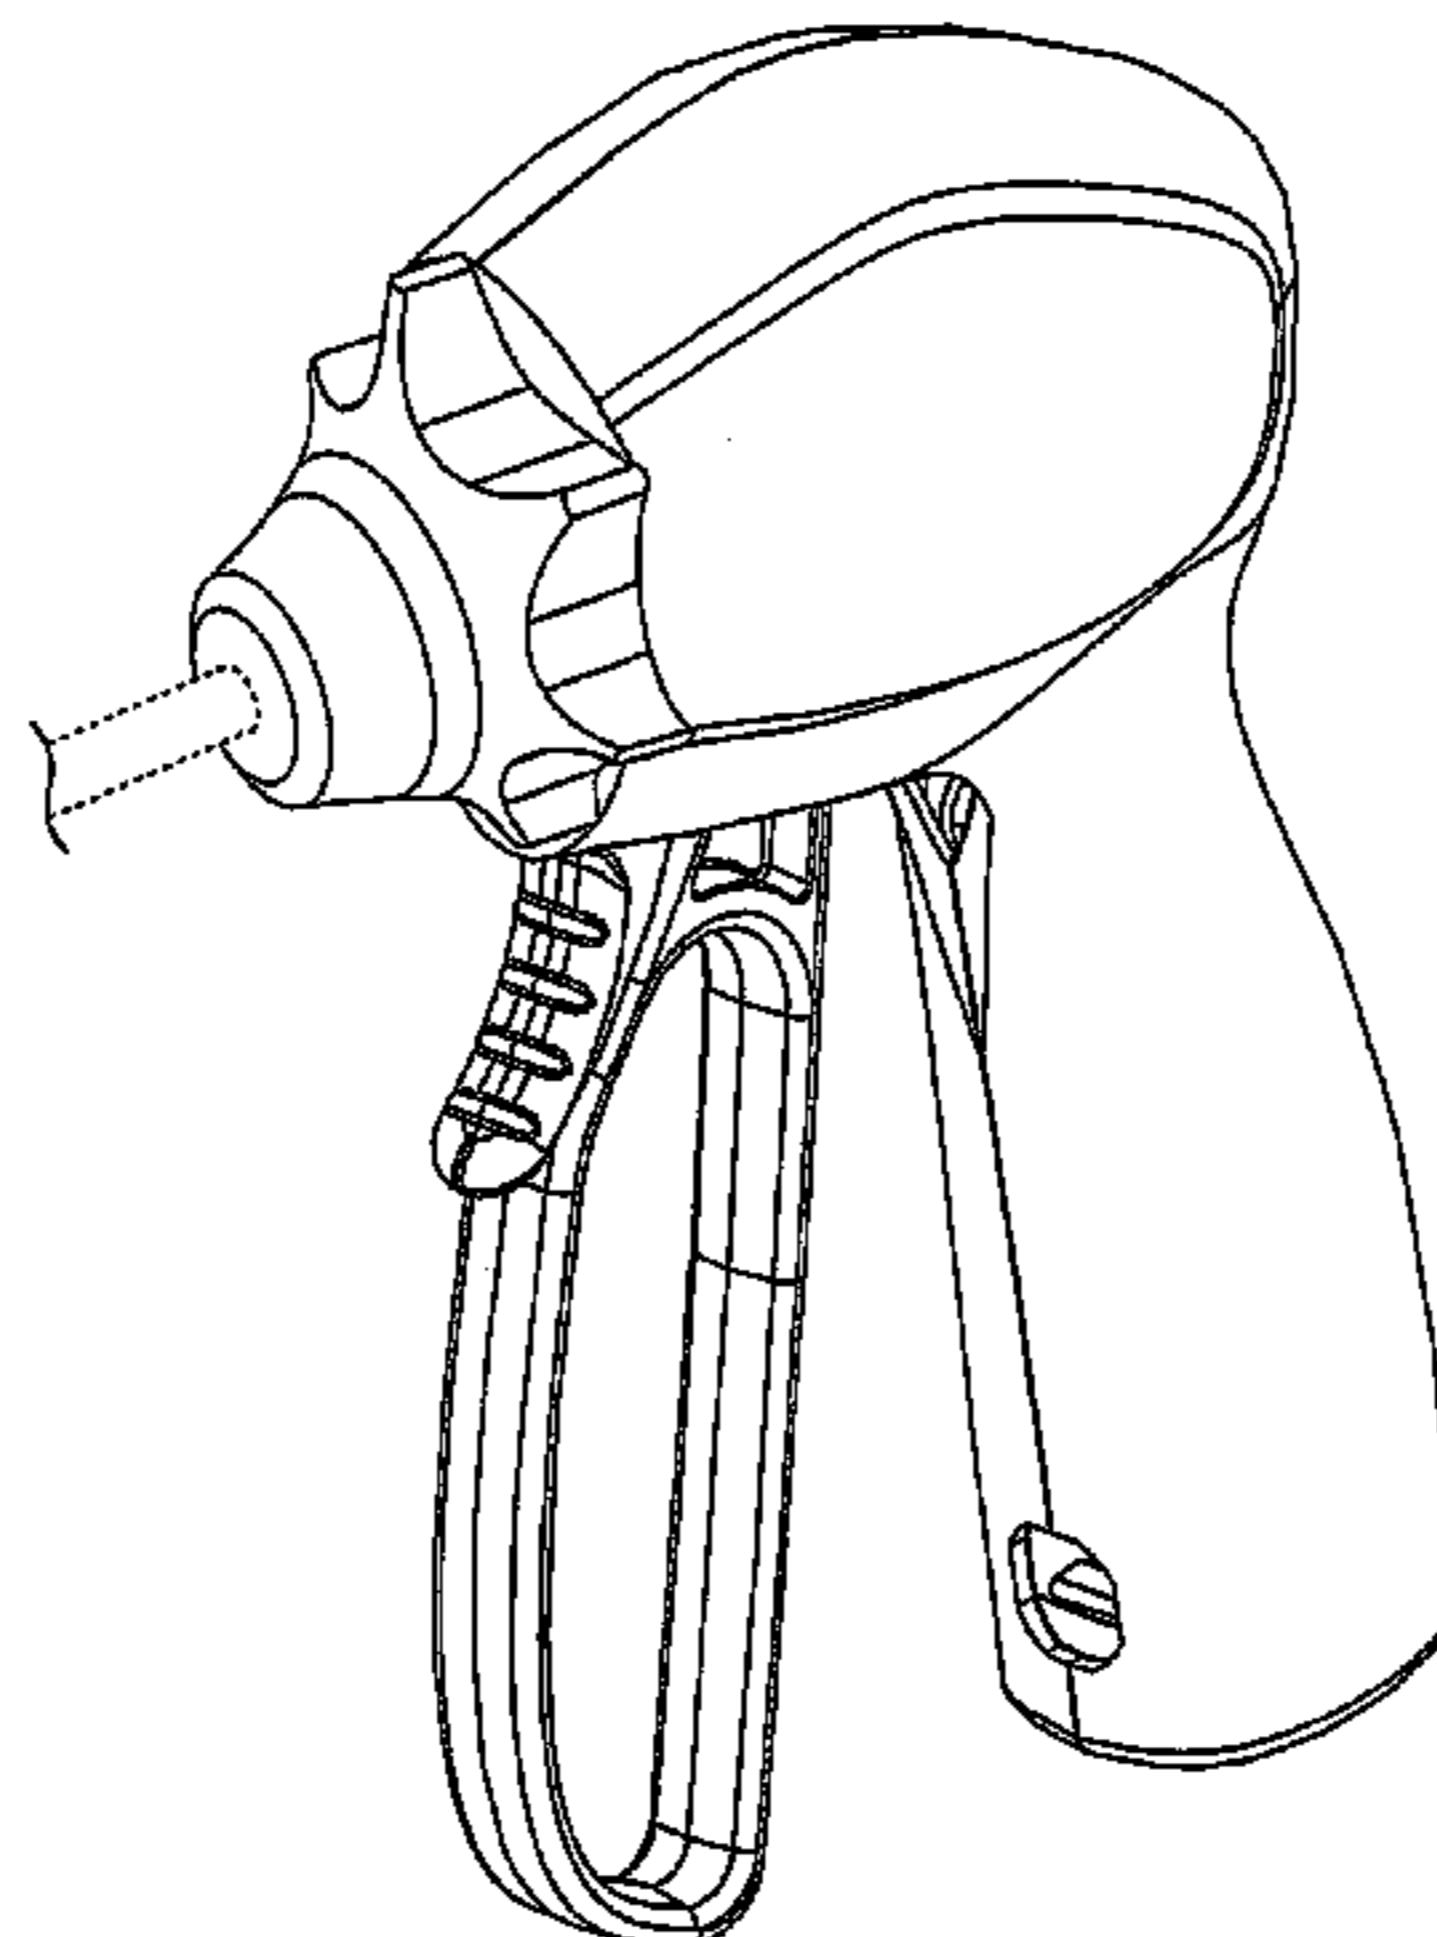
is a bottom view of the handle for laparoscopic device with distal rotation wheel of FIG. 1;
